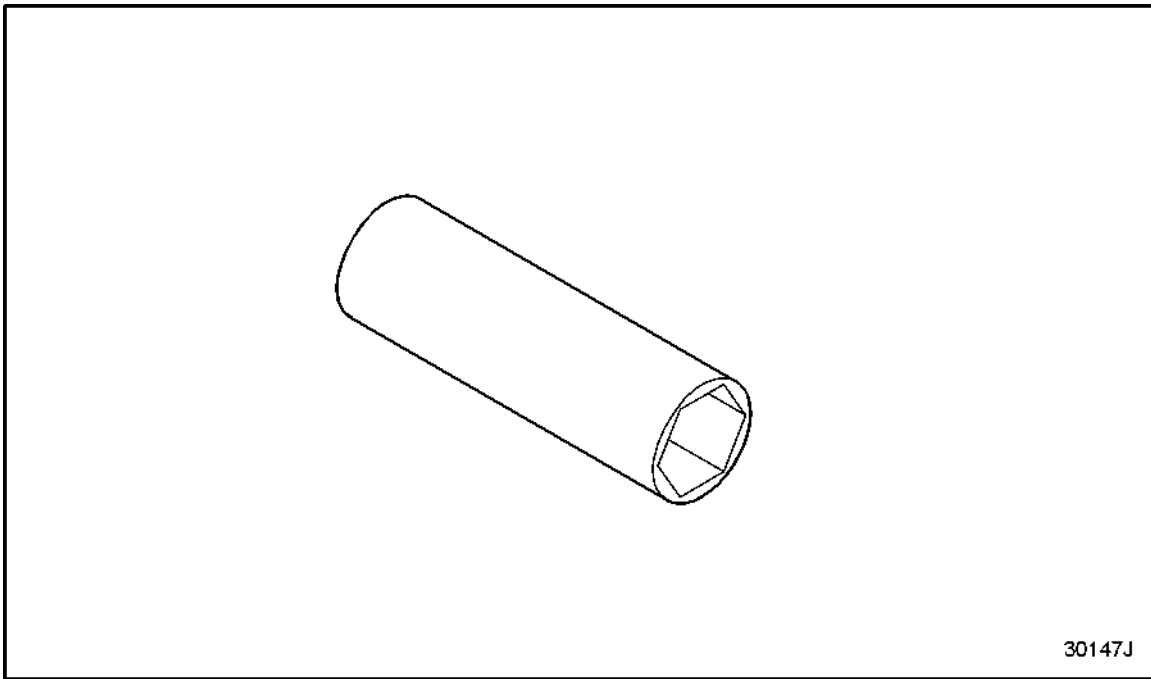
Valve Bridge Guide Install-Threaded,J 6846
